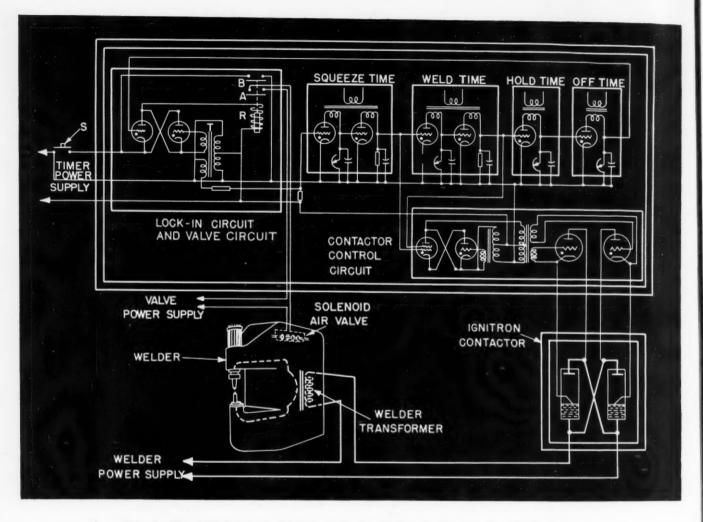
Simplified Circuit Diagram of the Weltronic Sequencing Weld Timer that is Used to Automatically Control the Resistance Welding Operations
